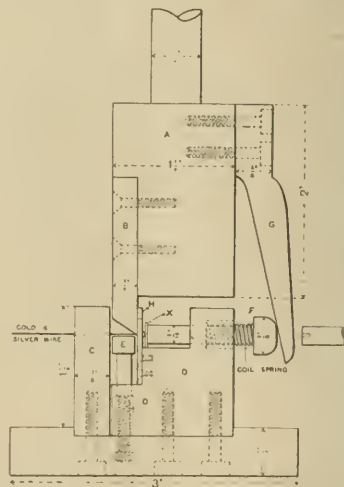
DEVICE FOR FIXING CONTACTS IN SPRINGS.
